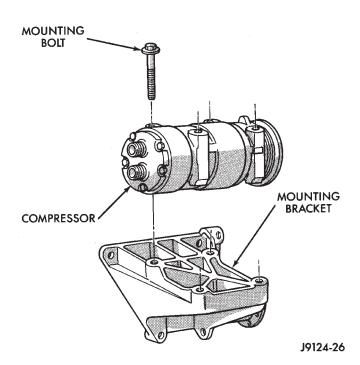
Compressor and Mounting Bracket (LH Drive Vehicles)
